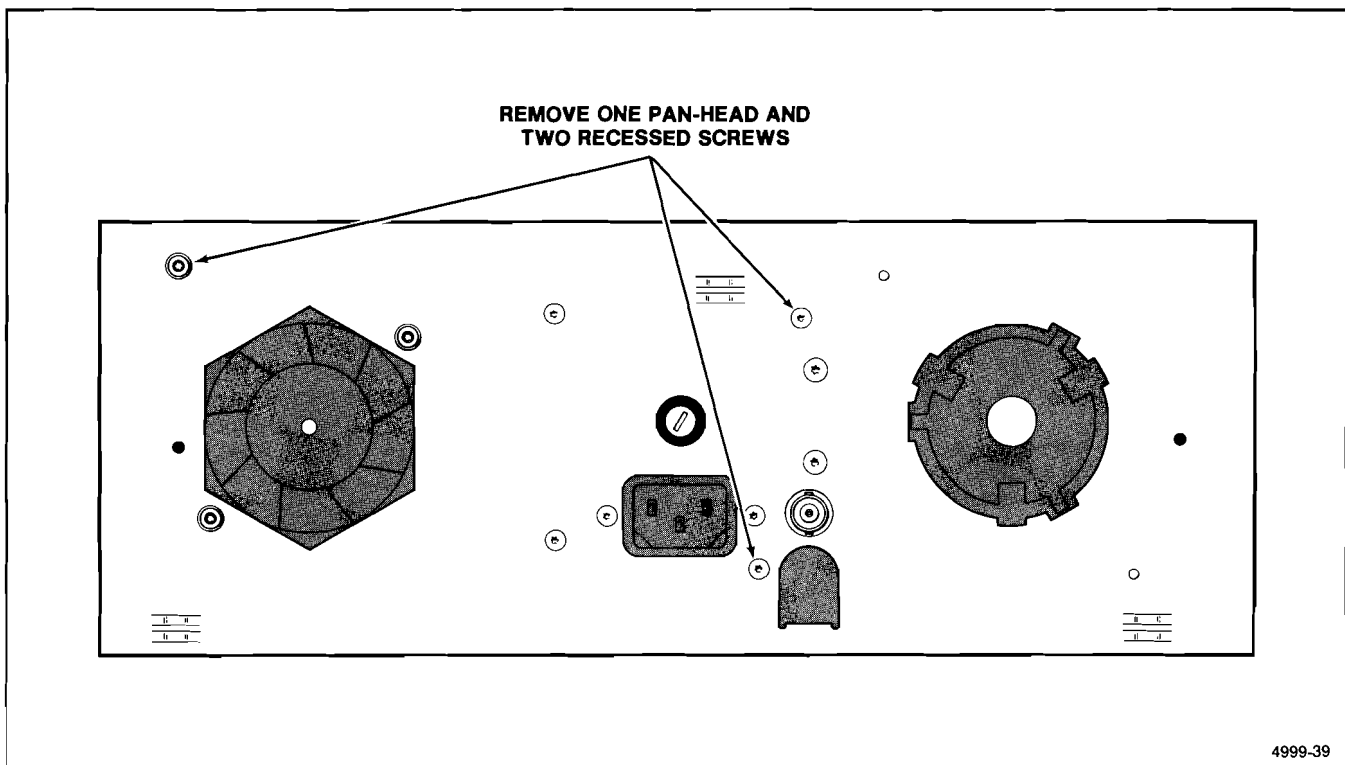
Location of screws securing Power-Supply shield and the support bracket to the rear chassis frame.
